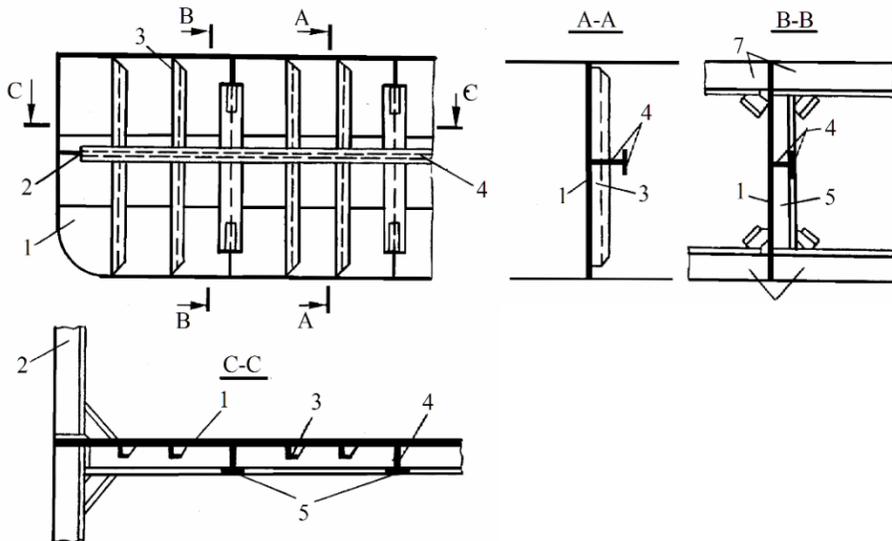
Transverse Bulkhead with Welded Vertical Frames [Authors, 4]
